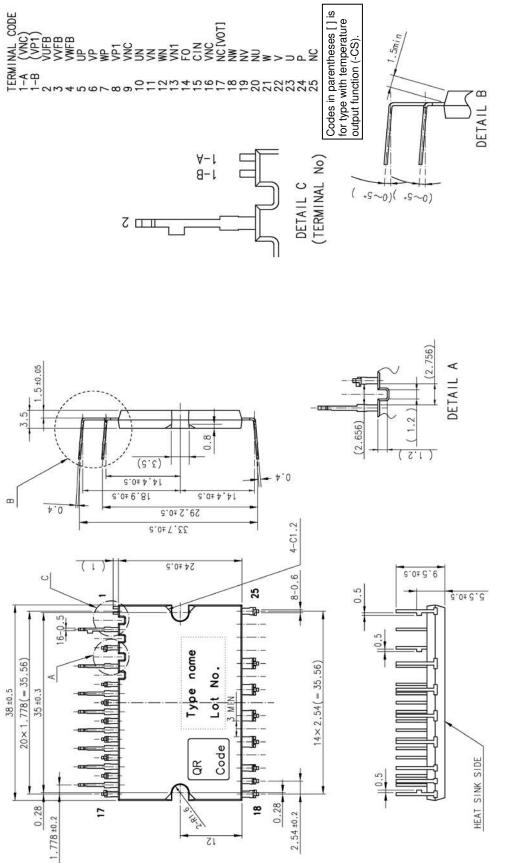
Long pin type package(-AS/-AST) outline drawing
